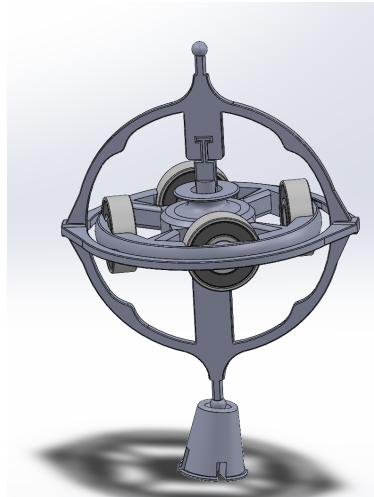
Gyroscope assembly, components 3D printed flat form PETG and snap-fit to assemble.
